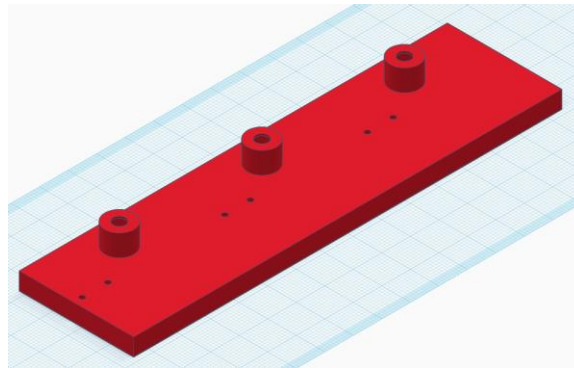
Laser Mount $\frac{3}{4}$ bottom view
